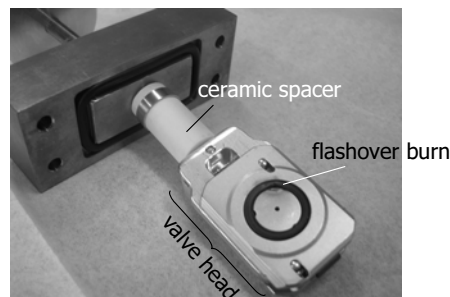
View on the valve head showing a partly burnt Viton o-ring.
